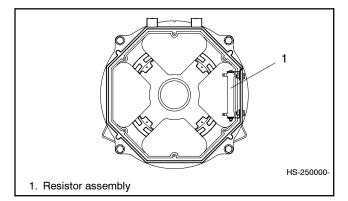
Resistor Assembly (7.5 and 10 kW)
